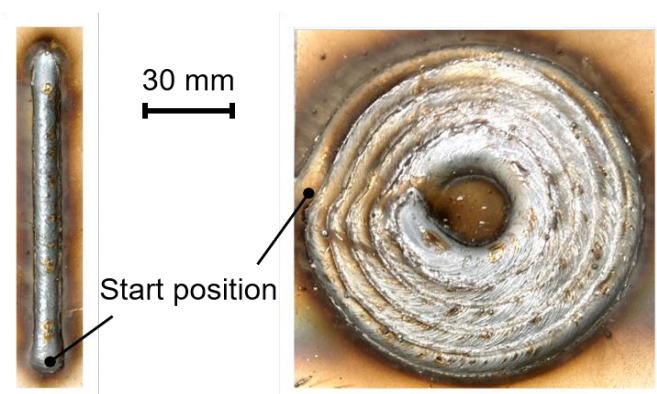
Welded structures, weld bead in the welding direction 0° (left), cladding with start position at 0° (right)
